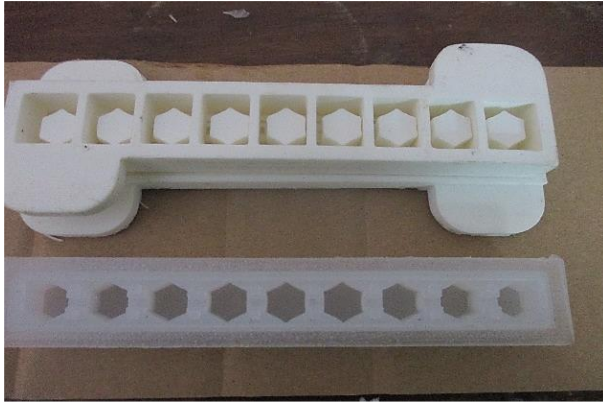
The fabricated main body of the actuator (bottom view) and its mold.
